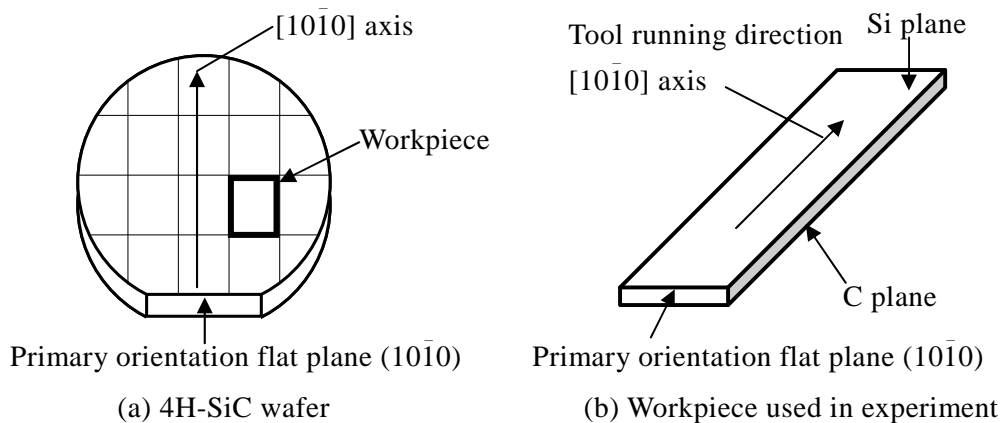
Schematic of workpiece shape and crystal orientation
